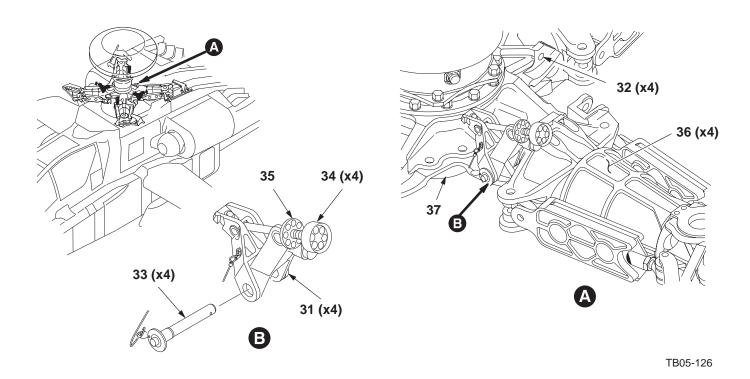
Installation of Flap Lock Assemblies on Main Rotor Hub
